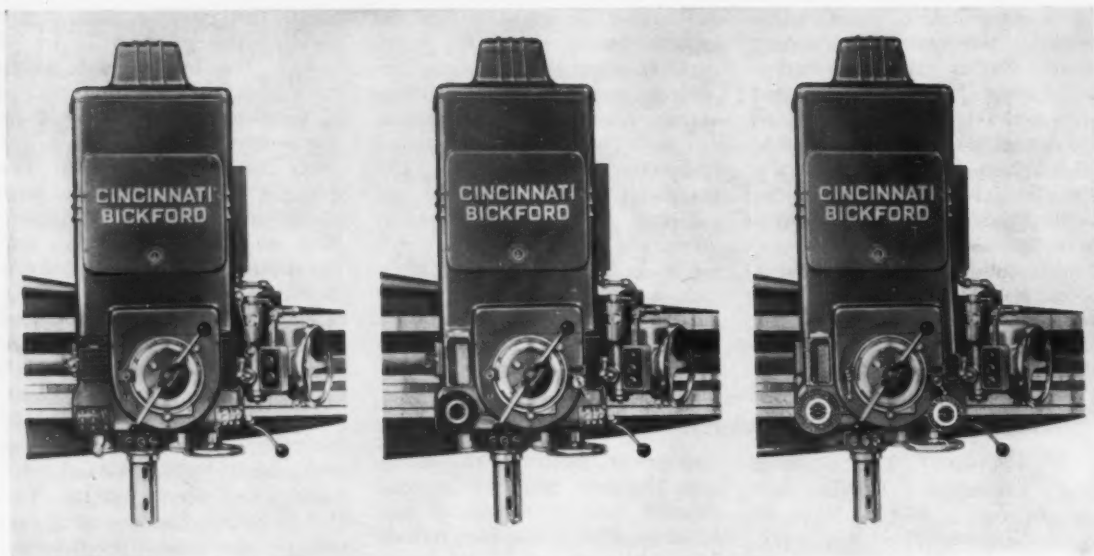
Three new optional heads for Cincinnati Bickford radial drilling machines
